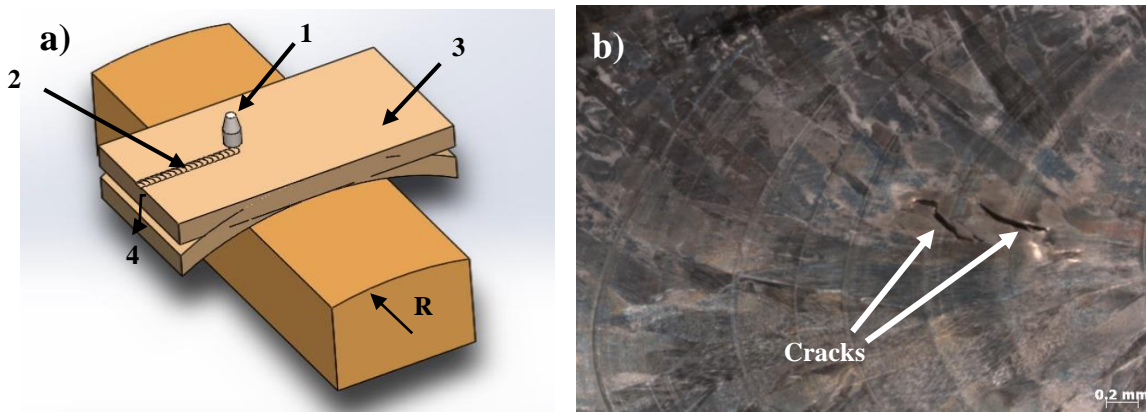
a) A sketch of an MVT technique with 1 = torch position at bending, 2 = weld bead, 3 = specimen and 4 = variable controlled bending speed by hydraulic system and b) a stereoscopic image of an MVT cracked sample ($\times 25$).
